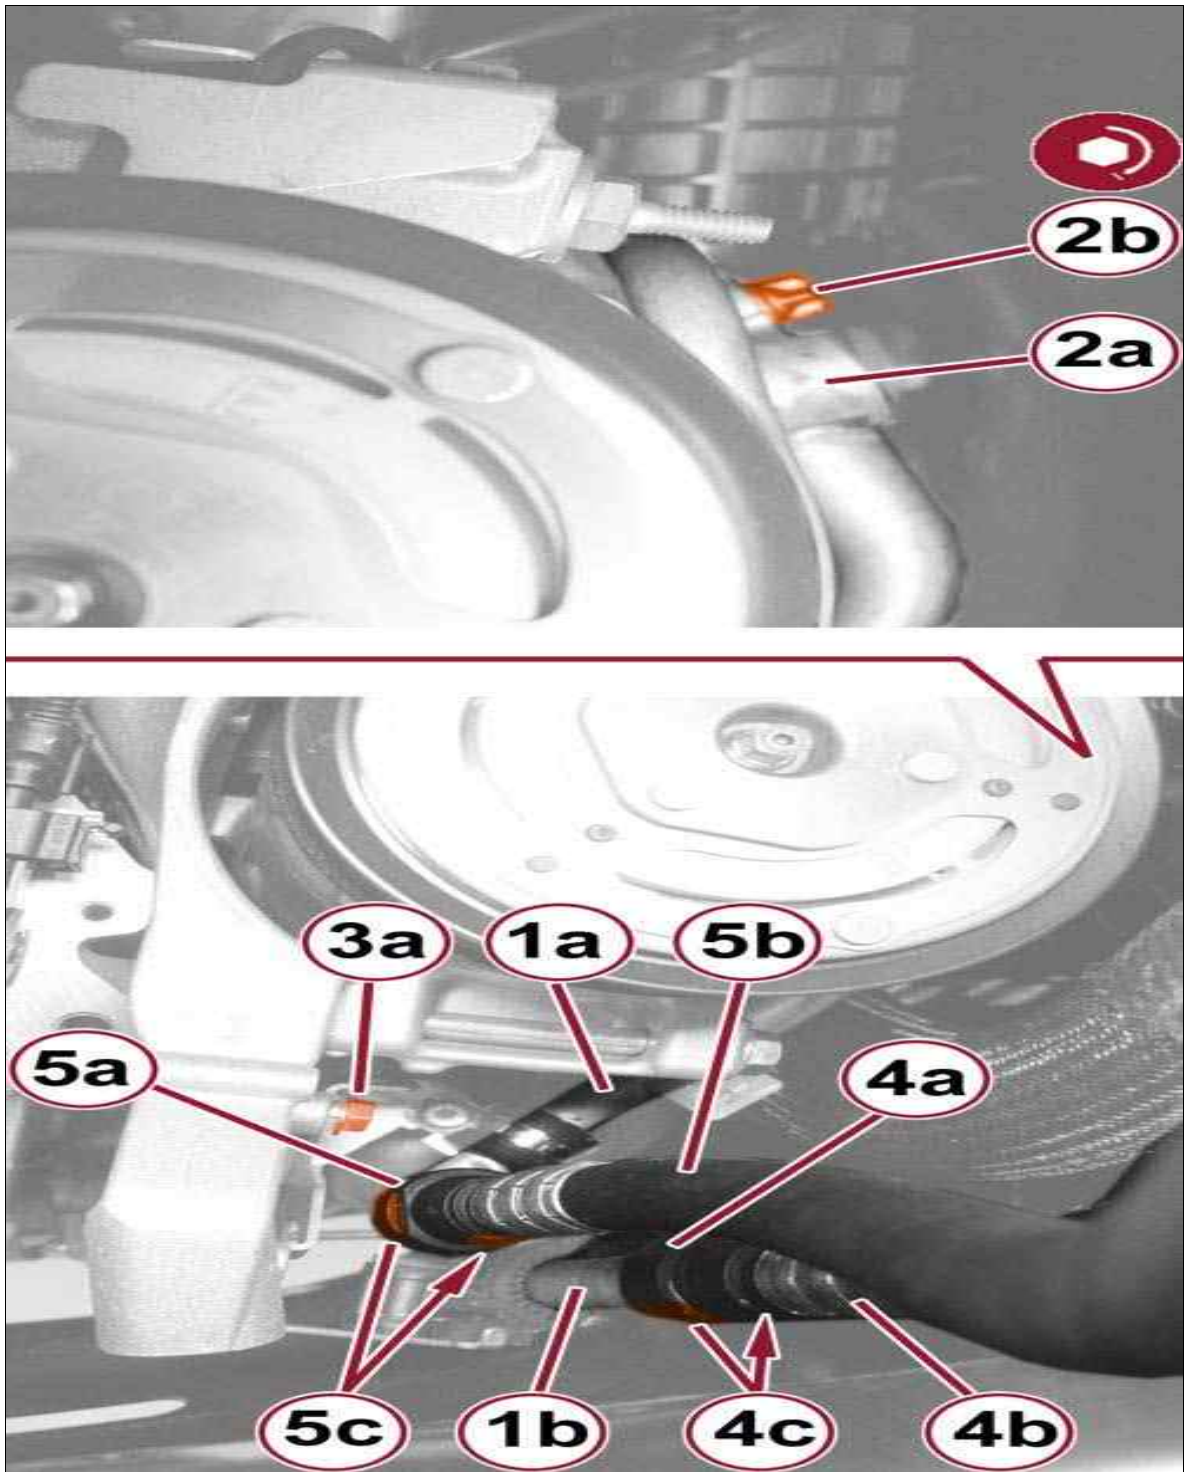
Compressor, Retaining Clip, Coupling & Internal Heat Exchanger
